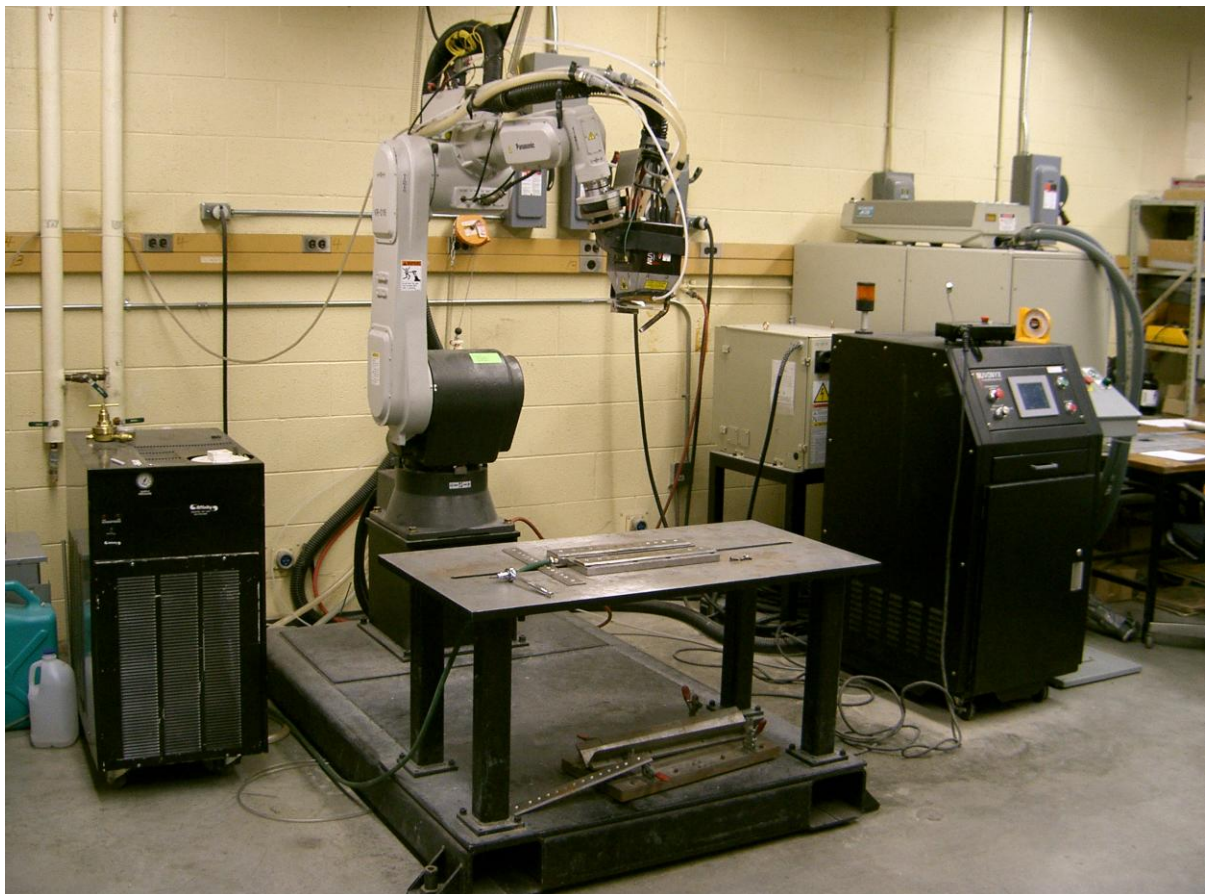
The Nuvonyx ISL-4000L 4 kW diode laser, controller, Panasonic 6-axis robotic arm, chiller, and welding table and clamps.
